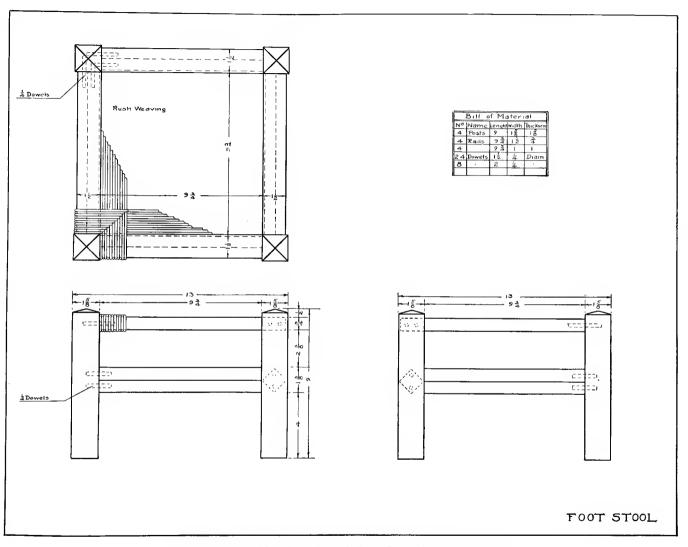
Working Drawing of Foot Stool (Eighth Grade)
